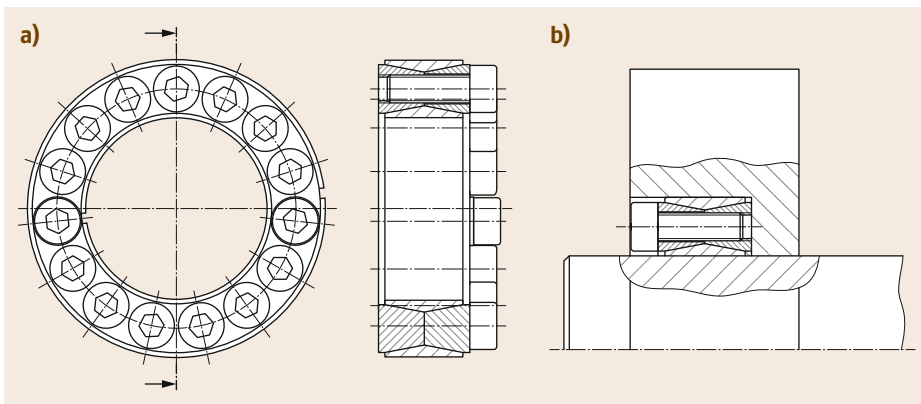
,b Ringfeder clamping set (a) and assembled clamping set (b)
